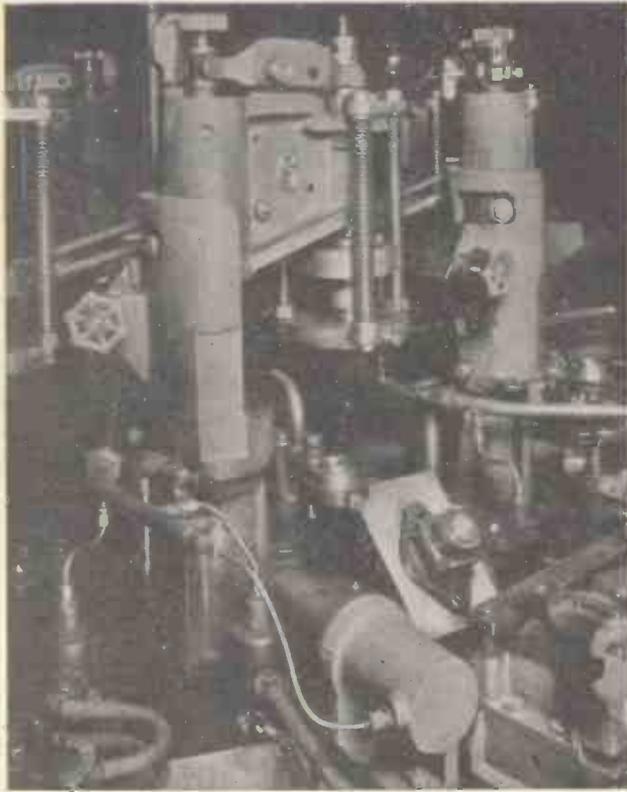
Mitchell 6-head automatic 9-pin base machine showing pin feeding mechanism. (Mitchell Glass Co. Ltd.)
